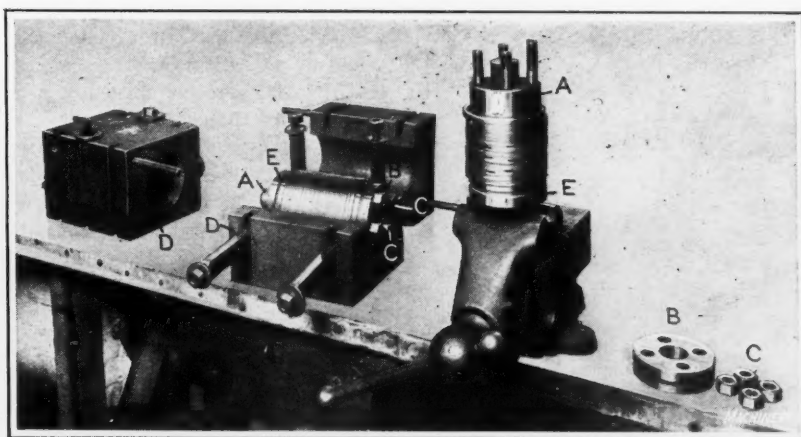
Special Form of Arbor for holding Outside Rings while finish-turning, and Fixture for centering the Rings on the Arbor
